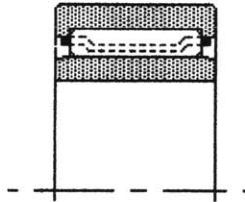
Cross-section of Needle Roller Bearing. Source: NSK-RHP
